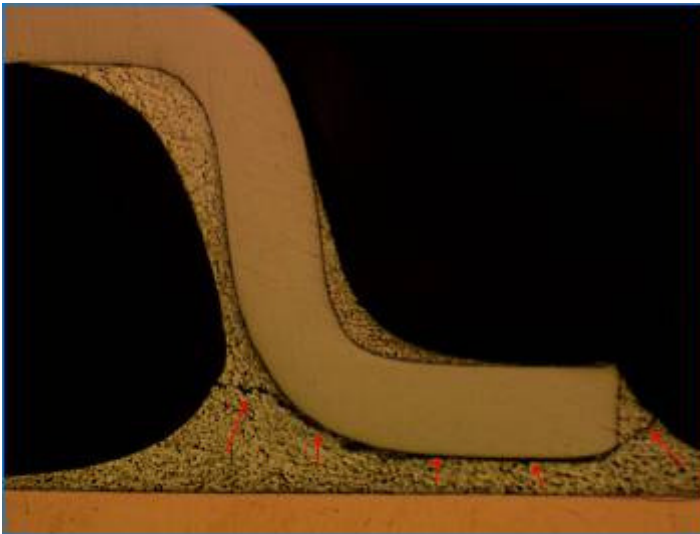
cross section, SN63, U61, right lead solder crack, 100x
